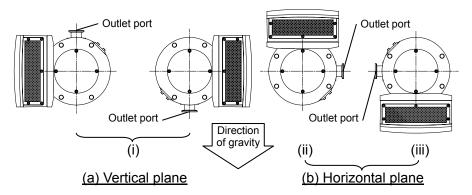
Positions of the Outlet Port on the Horizontally or Slanted Installed STP Pump
